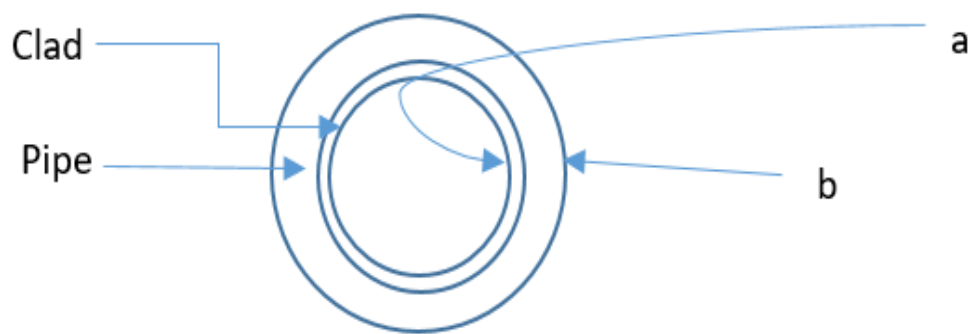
Inner and outer surfaces of the pipe – cross sectional view
